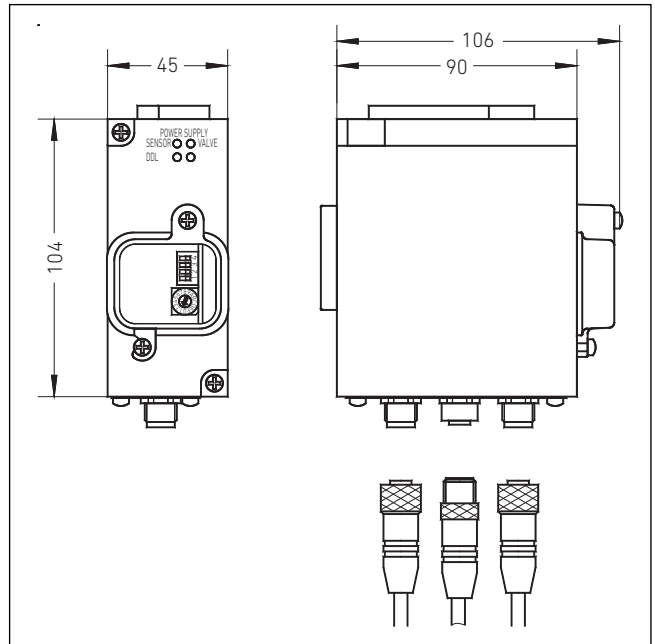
Dimensions of valve driver (337 500 005/337 500 015 0)
